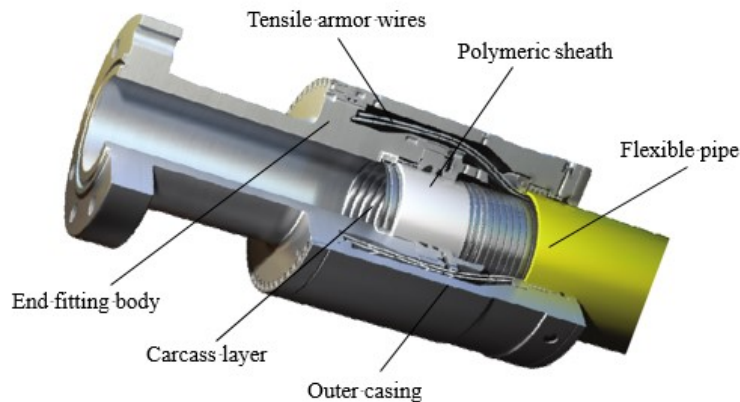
Typical cross section of flexible-pipeline end fitting [8].
